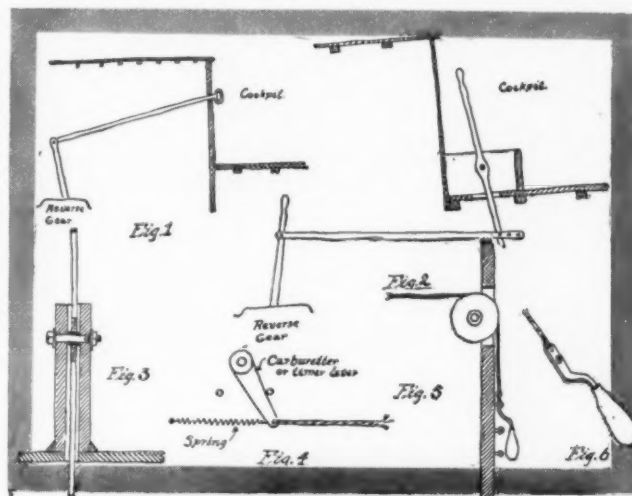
is self-explanatory and is probably familiar to many. Fig. 2 is a method which will be found satisfactory whether the reverse gear is fore or aft the controlling point. A piece of
